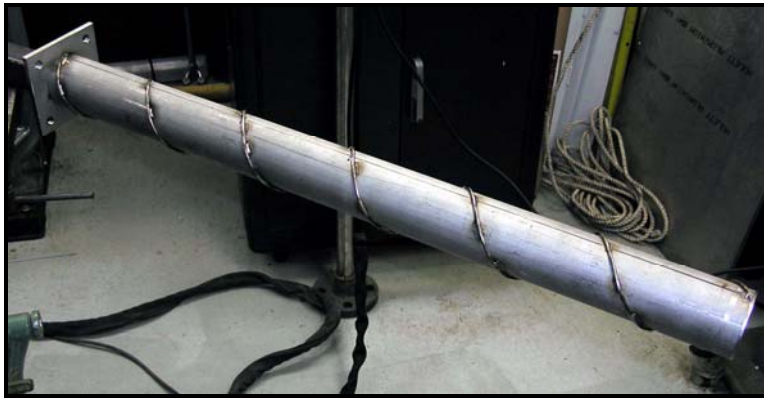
Construction of the long heat exchanger with helical rod welded in place
